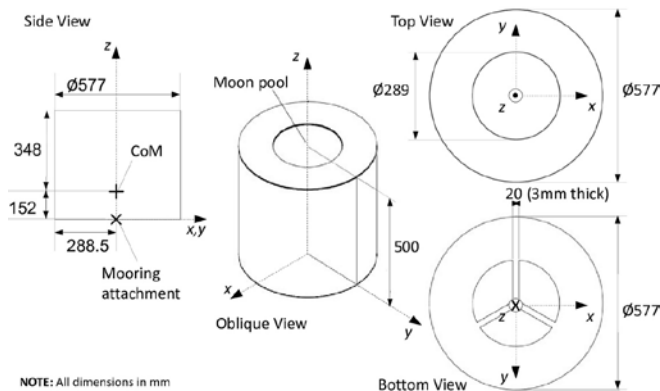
Geometry 2: cylindrical moon pool (dimensions in mm) [12].
